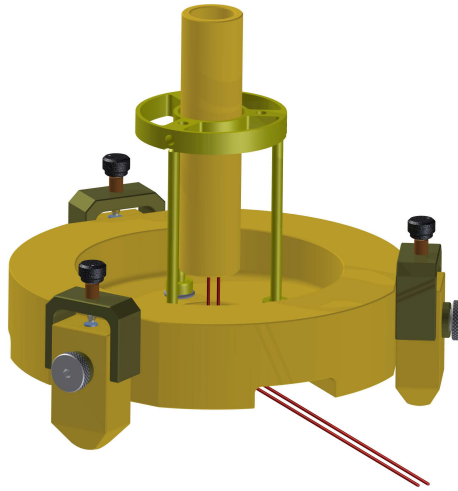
CAD drawing of a new design of a more dimensionally stable Zerodur ring sample holder to minimize the tilt of the sample.
